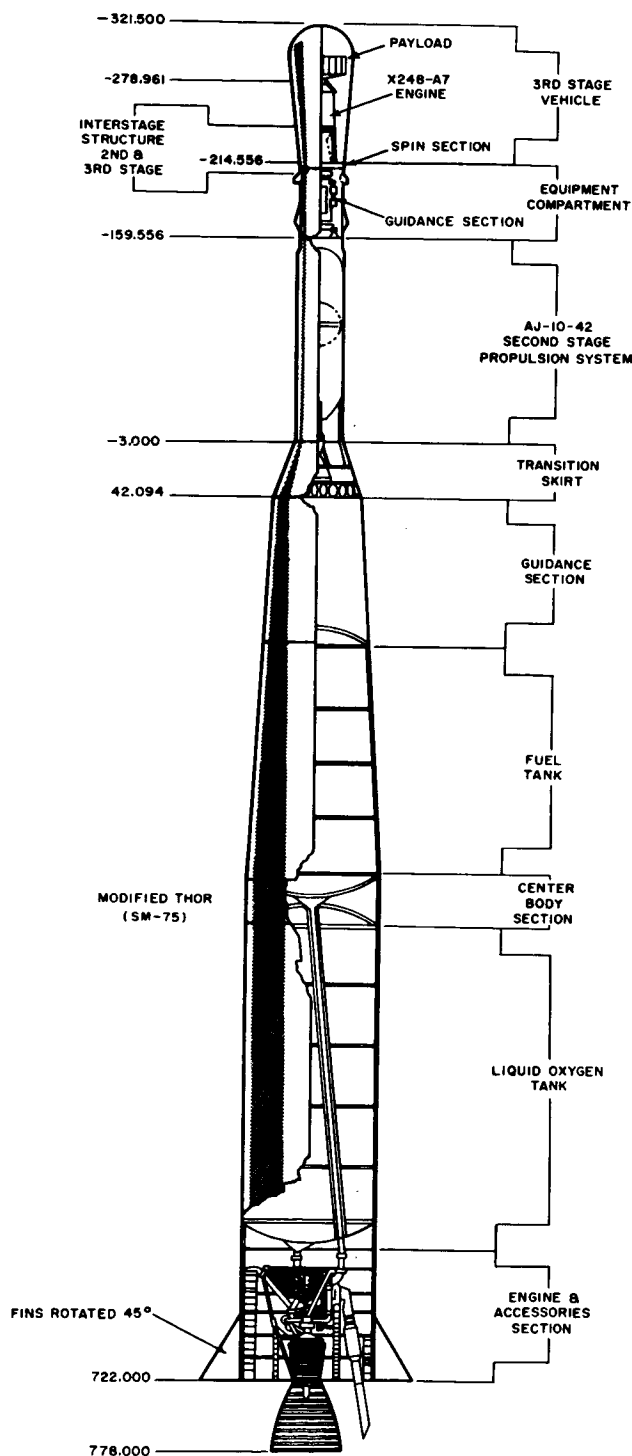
The TIROS I launching rocket, outline drawing.
